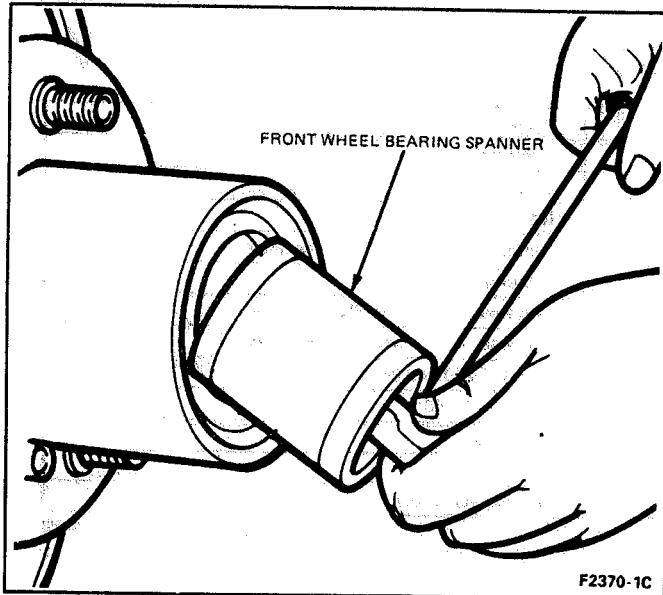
Lock Nut, Lock Ring and Adjusting Nut Removal
